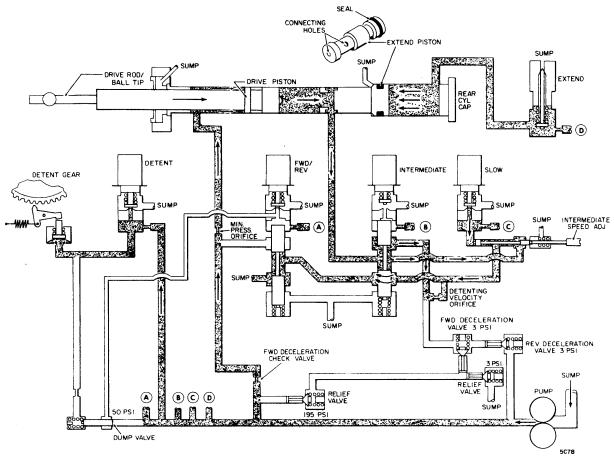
Hydraulic Actuator - Reverse Intermediate
